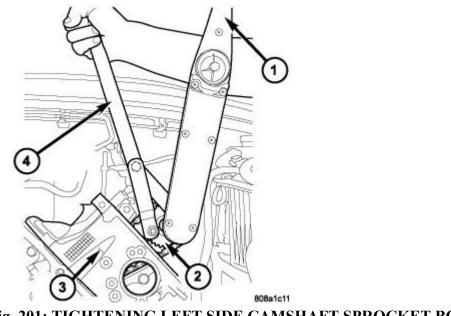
TIGHTENING LEFT SIDE CAMSHAFT SPROCKET BOLT Courtesy of CHRYSLER LLC
